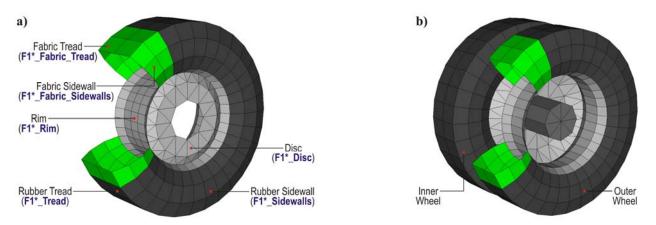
FE model of the crane wheel: a) a complete front wheel, b) complete rear dual wheels
